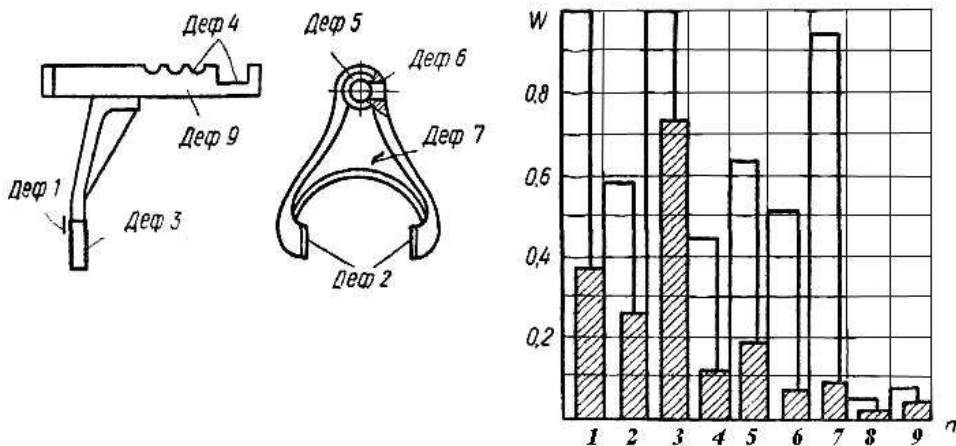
Part defect characteristics of «Shift fork» subclass: n – defect name; W – average defect recurrence; 1 – fork bend; 2 – wear of fork jaw opening by width; 3 – wear of web surfaces by thickness; 4, 5 – wear of grooves and openings; 6 – wear of threaded openings; 7 – cracks, fractures; 8, 9 – wear of outer cylindrical surfaces and rods
